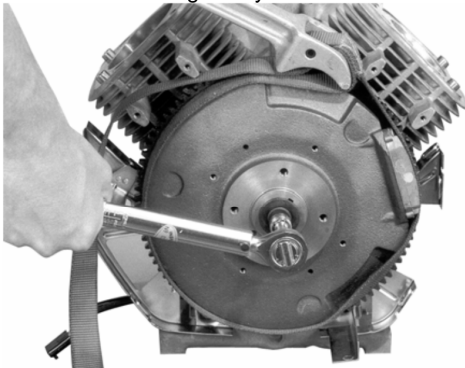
Hold Flywheel with a Strap Wrench while Torquing Fastener.
